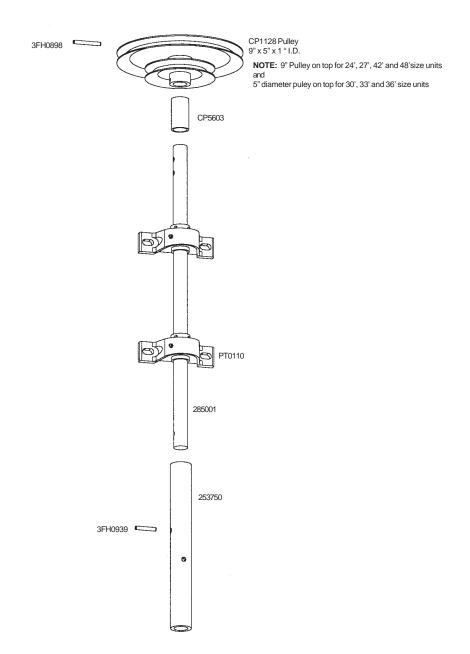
Stub Auger Assembly used with Slow Down Kit - No. 6 (280006)
